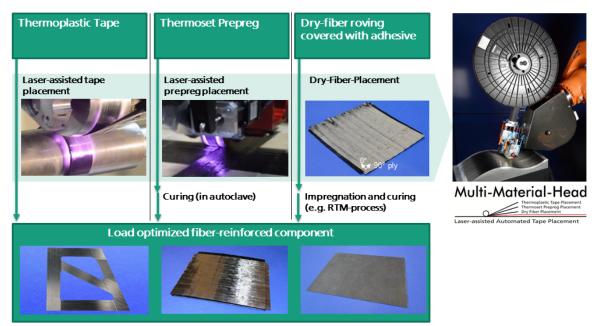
Manufacture of load-optimized fibre reinforced components using Multi-Material-Head tape- and fibre-placement system
